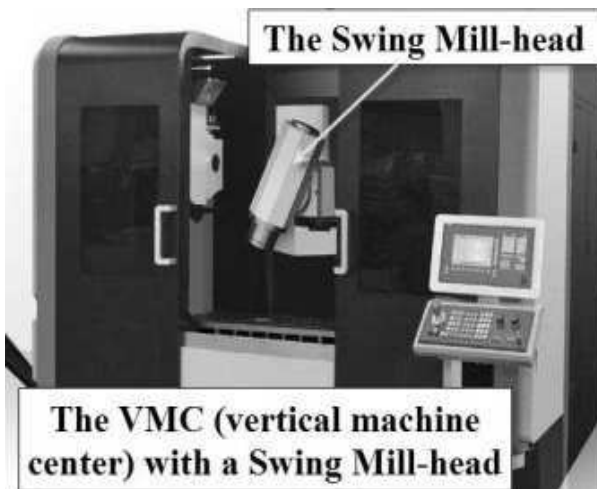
The VMC (vertical machine center) with a swing mill-head
